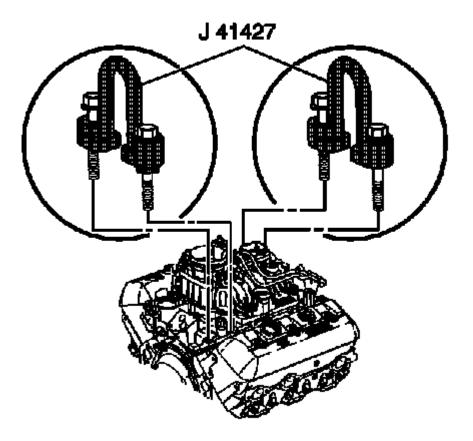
View Of J 41427 & Lower Intake Manifold Courtesy of GENERAL MOTORS CORP.
